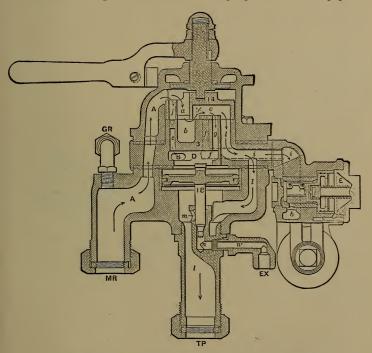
Release Position G-6 Automatic Brake Valve.
